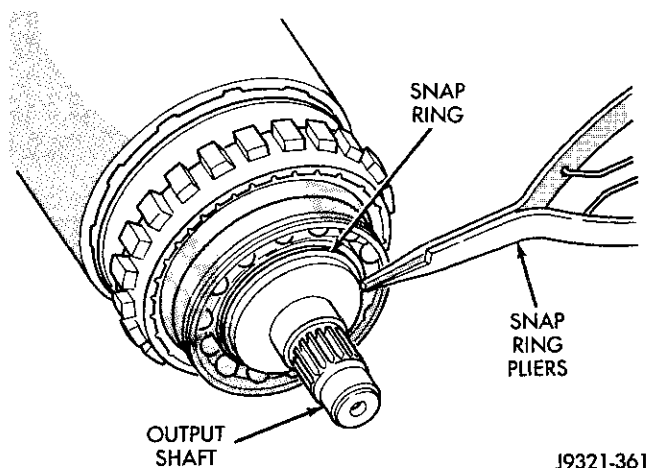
Rear Bearing Snap Ring Removal/Installation
